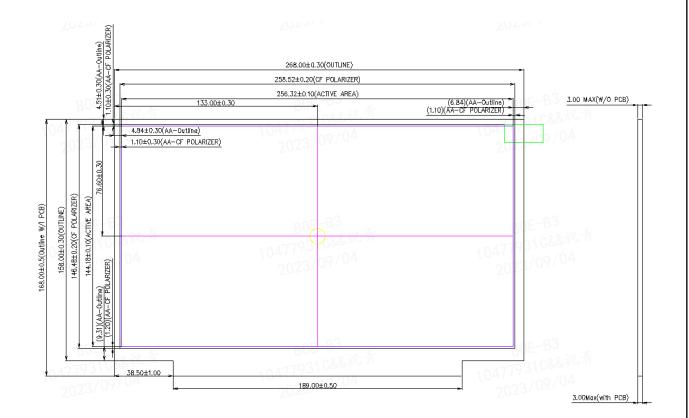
TFT-LCD Module Outline Dimension (Front View)
